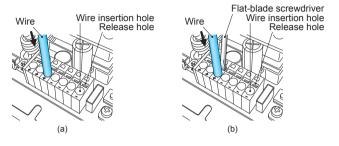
Connecting method of Ferrule terminal and Solid wire
